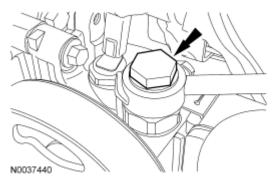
Locating Power Steering Pressure (PSP) Tube Bolt Courtesy of FORD MOTOR CO.
